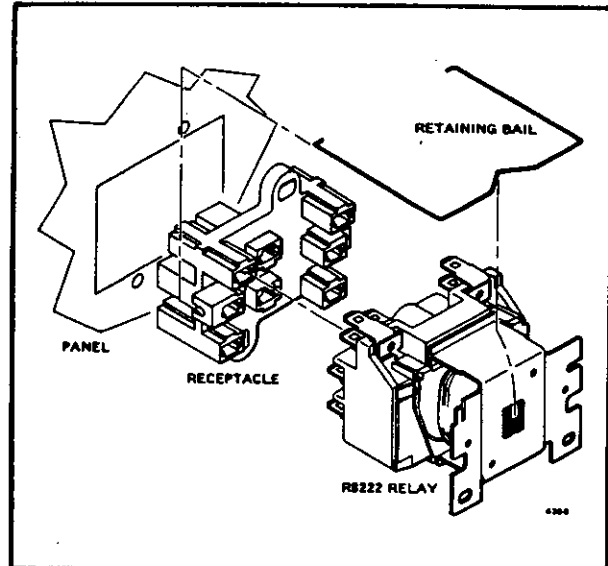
RELAY MOUNTING USING RECEPTACLE AND RETAINING BAIL.
